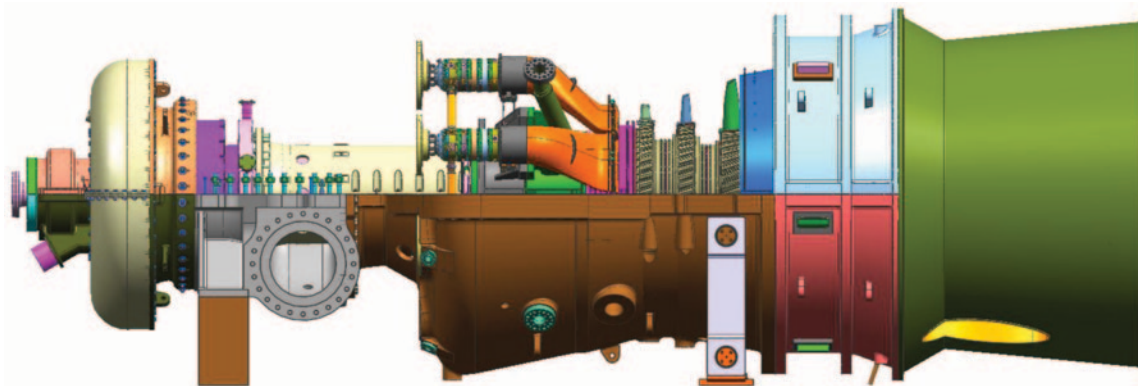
OFT-900 Concept Drawing (Top Casing Removed to Show Detail)
